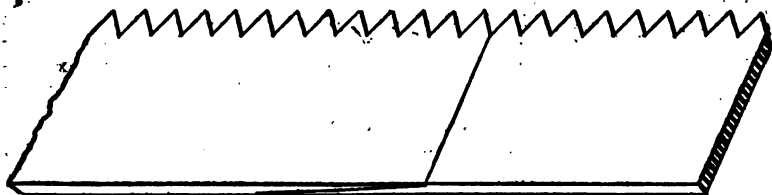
,639.—Method of lap brazing a band saw. *In making the lap*, the two ends are chamfered by filing to make an accurate joint as shown. Silver solder is generally used, it being applied between the two surfaces, or the surfaces are coated with borax and the solder allowed to flow into the joint from the edges. After firmly clamping the parts in position, the solder is laid over the joint, or it may be placed between the two pieces to be united. When the heat is applied, the solder melts and the two pieces must be squeezed tightly together to force out surplus solder. Silver coins contain 10 per cent. of copper and make a good hard solder. When using a coin, pound it until very thin and then place between the two surfaces to be brazed.
